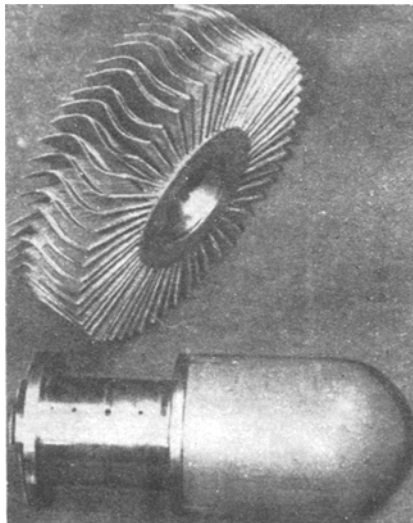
Rotor with gas bearing housing and mount with sleeve in self-driven separator.
